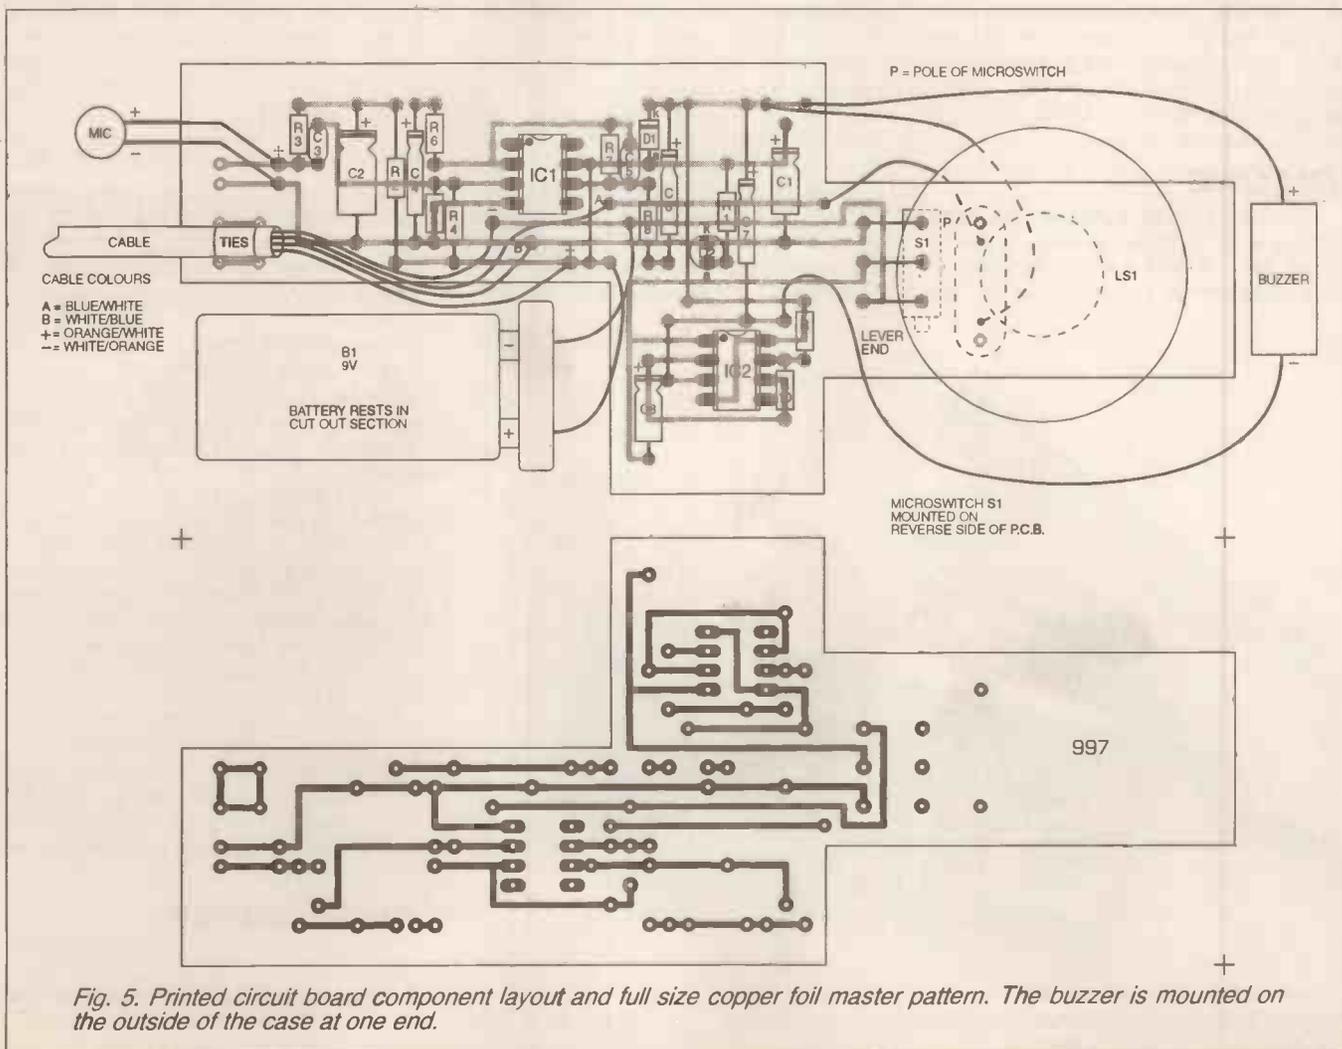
Printed circuit board component layout and full size copper foil master pattern. The buzzer is mounted on the outside of the case at one end.
